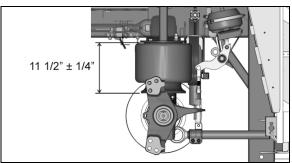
TAG AXLE AIR SPRING CLEARANCE
